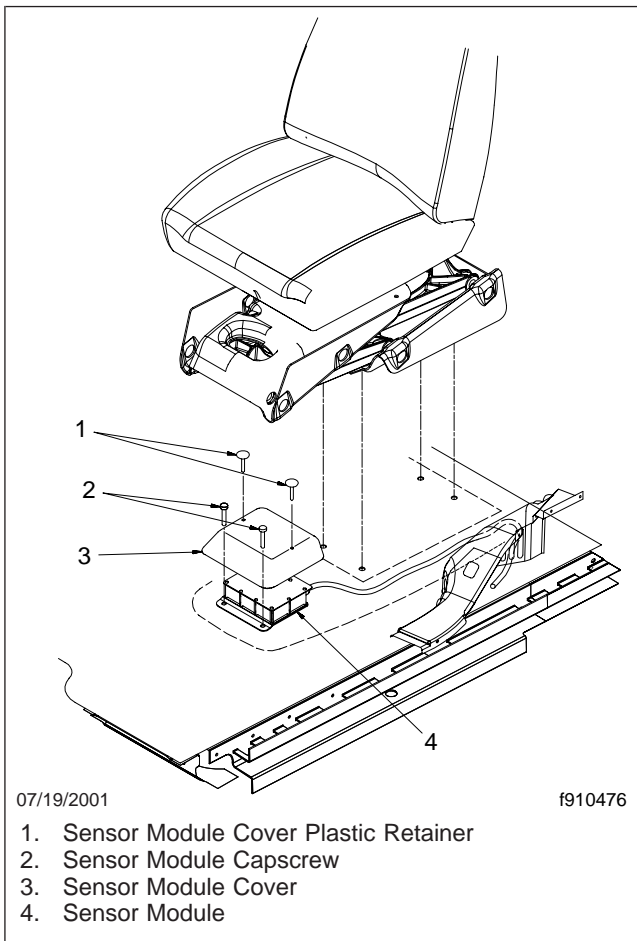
, EzyRider Seat With Air Bag Sensor Module
